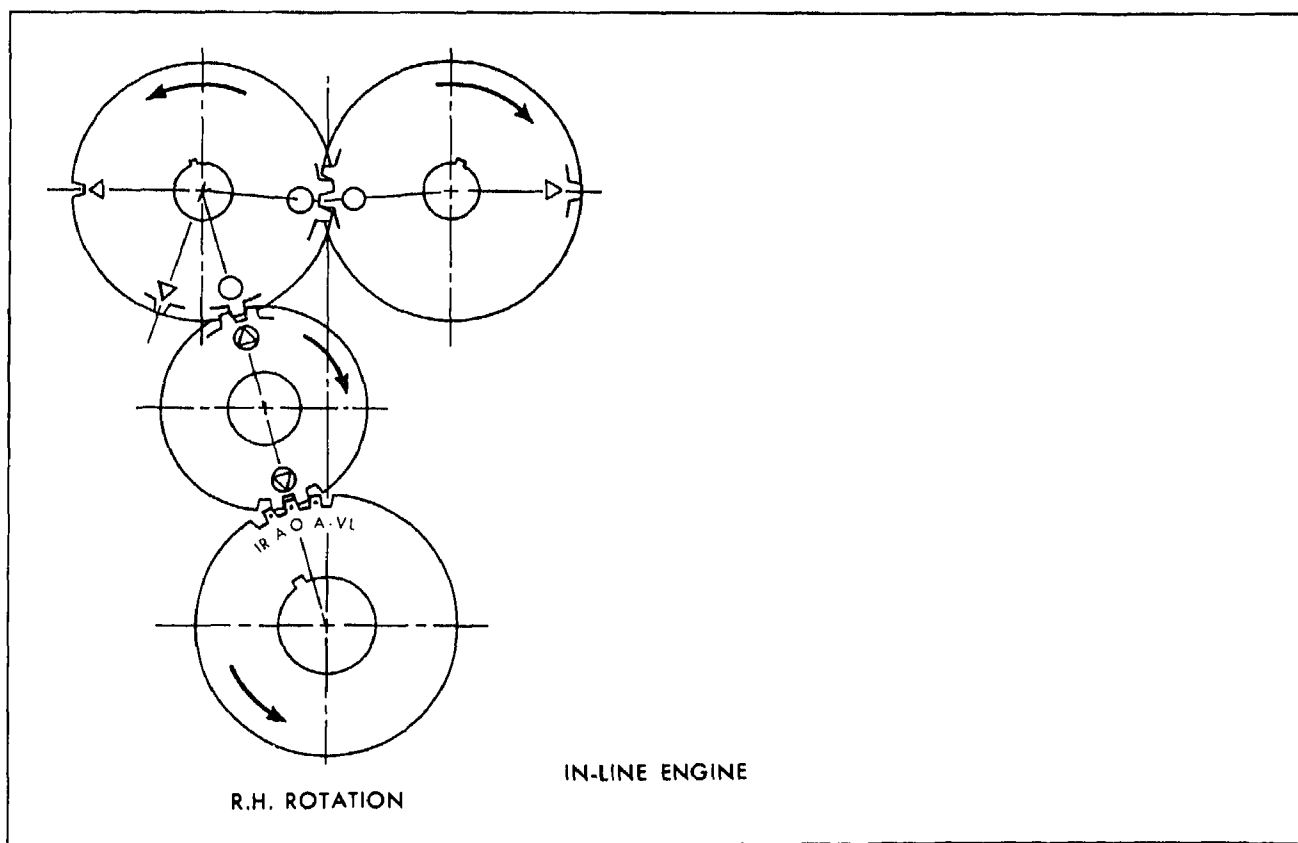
In-Line Engine Gear Train Timing Marks (Standard Timing Shown)
